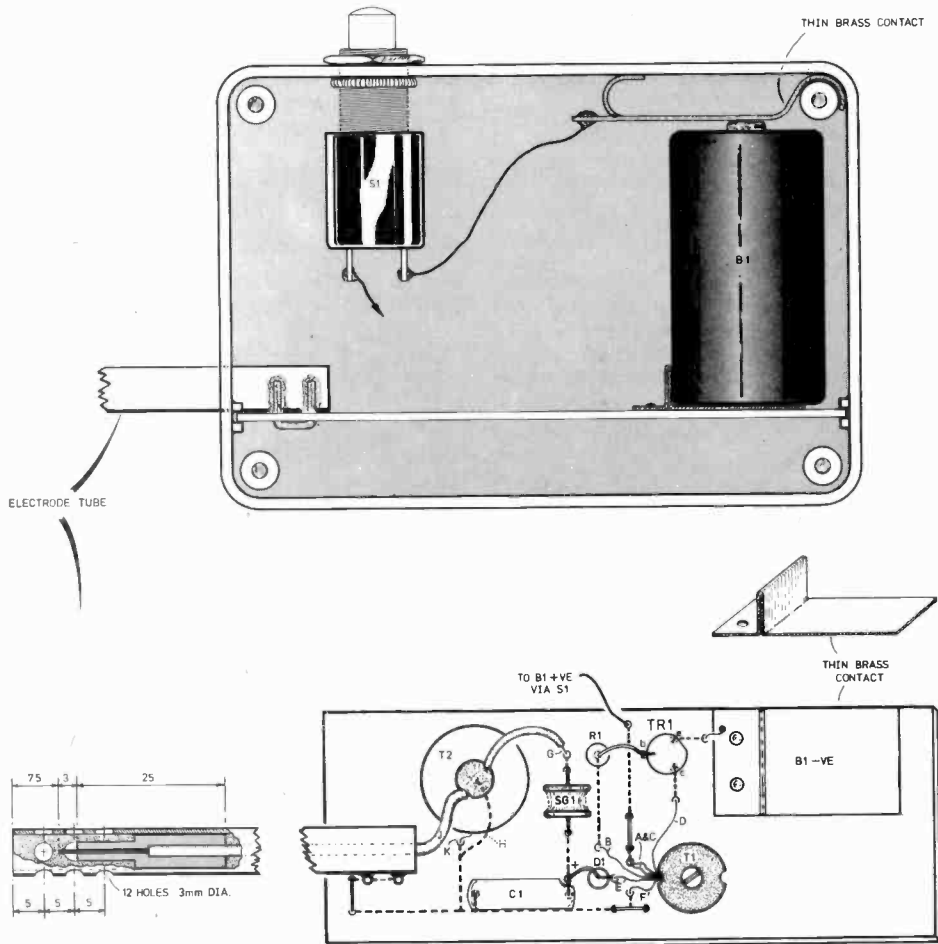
Construction and component layout for the matrix board and case, together with details of the electrode tube
